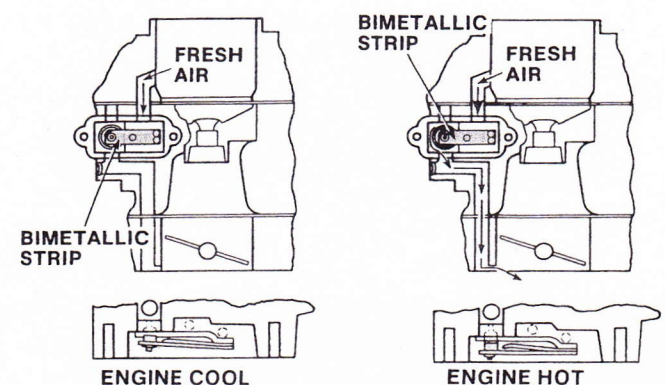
Hot-idle compensator operation: engine hot, valve open.
